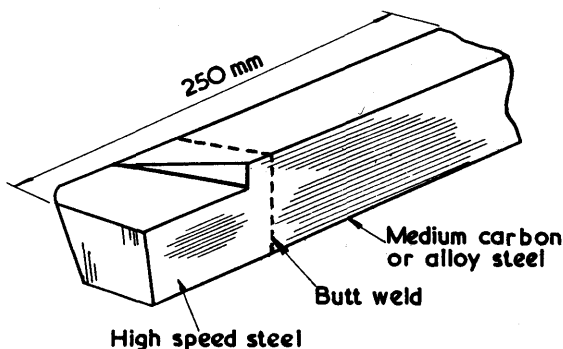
Butt Welded Lathe Tool.
